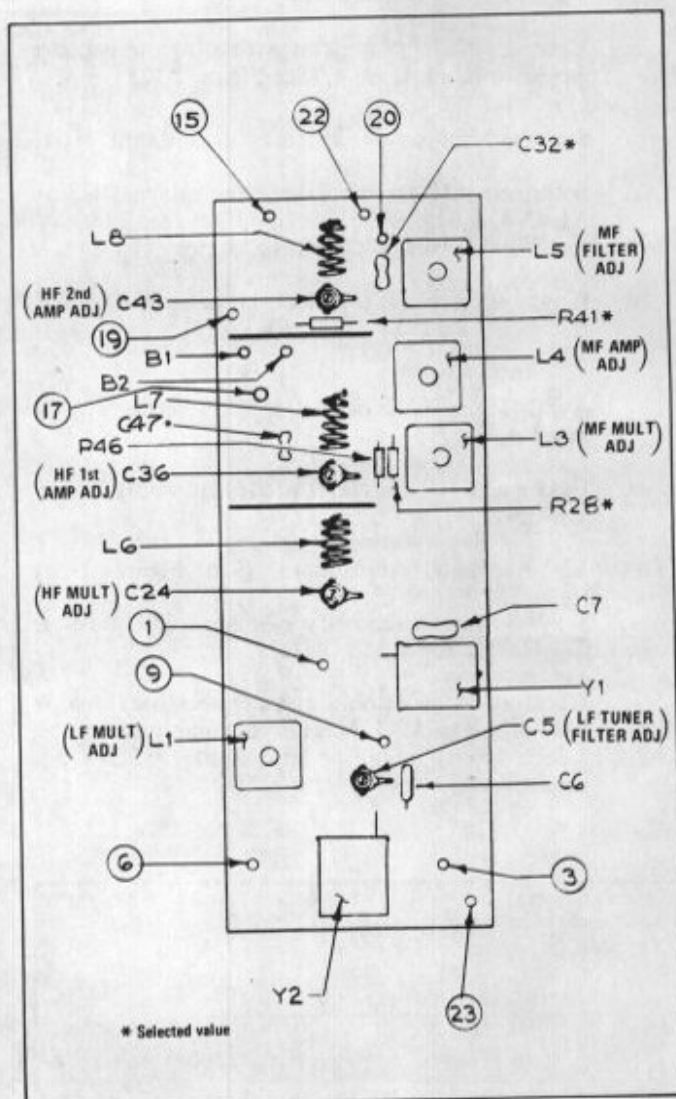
Trimmer Locations, Frequency Generator Assemblies, A12 thru A15
